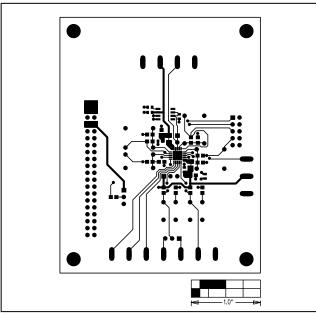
MAX5581 EV Kit PC Board Layout—Component Side
